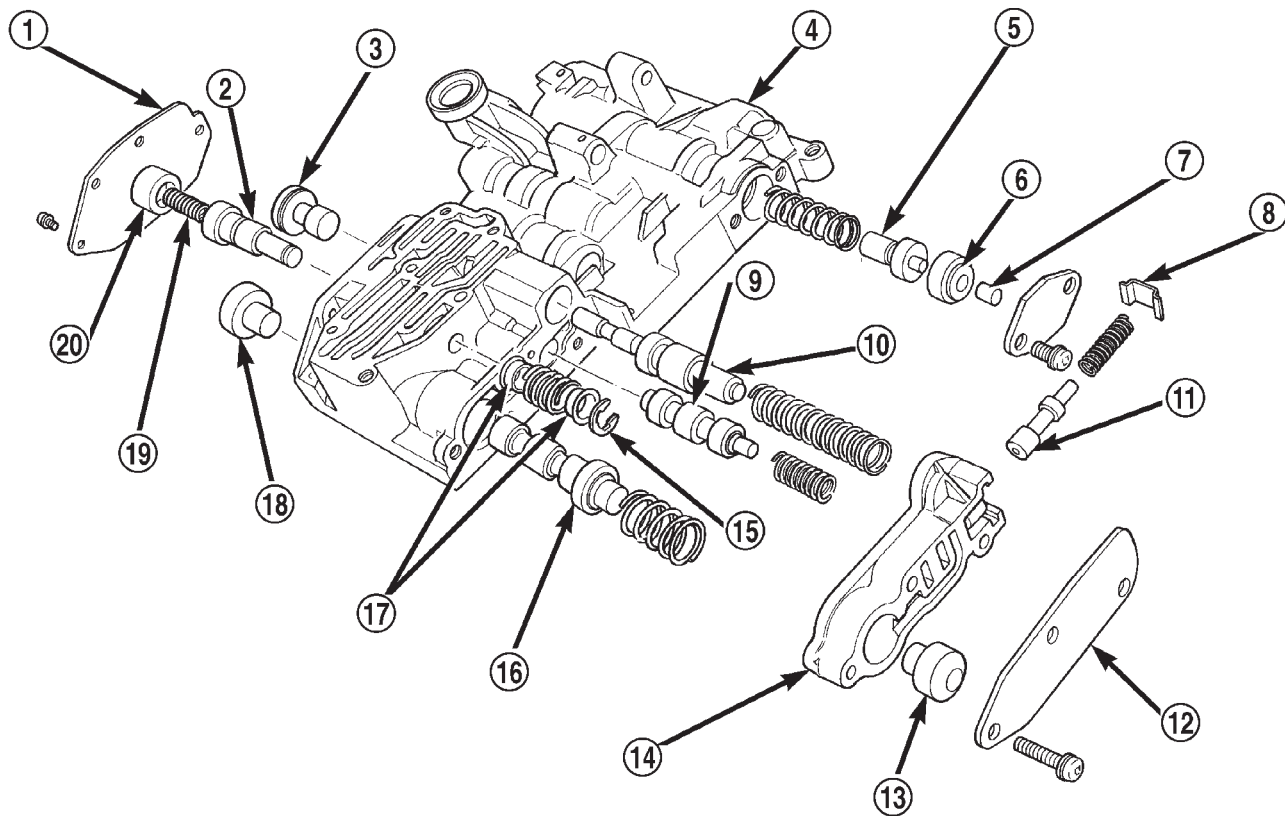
Control Valves, Shift Valves, And Governor Plugs
